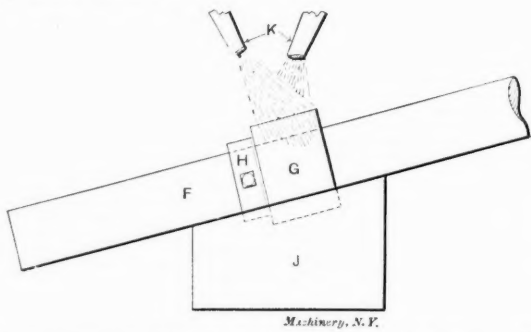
Arrangement of Cooling Tank when Shrinking Collars on Shafts.
